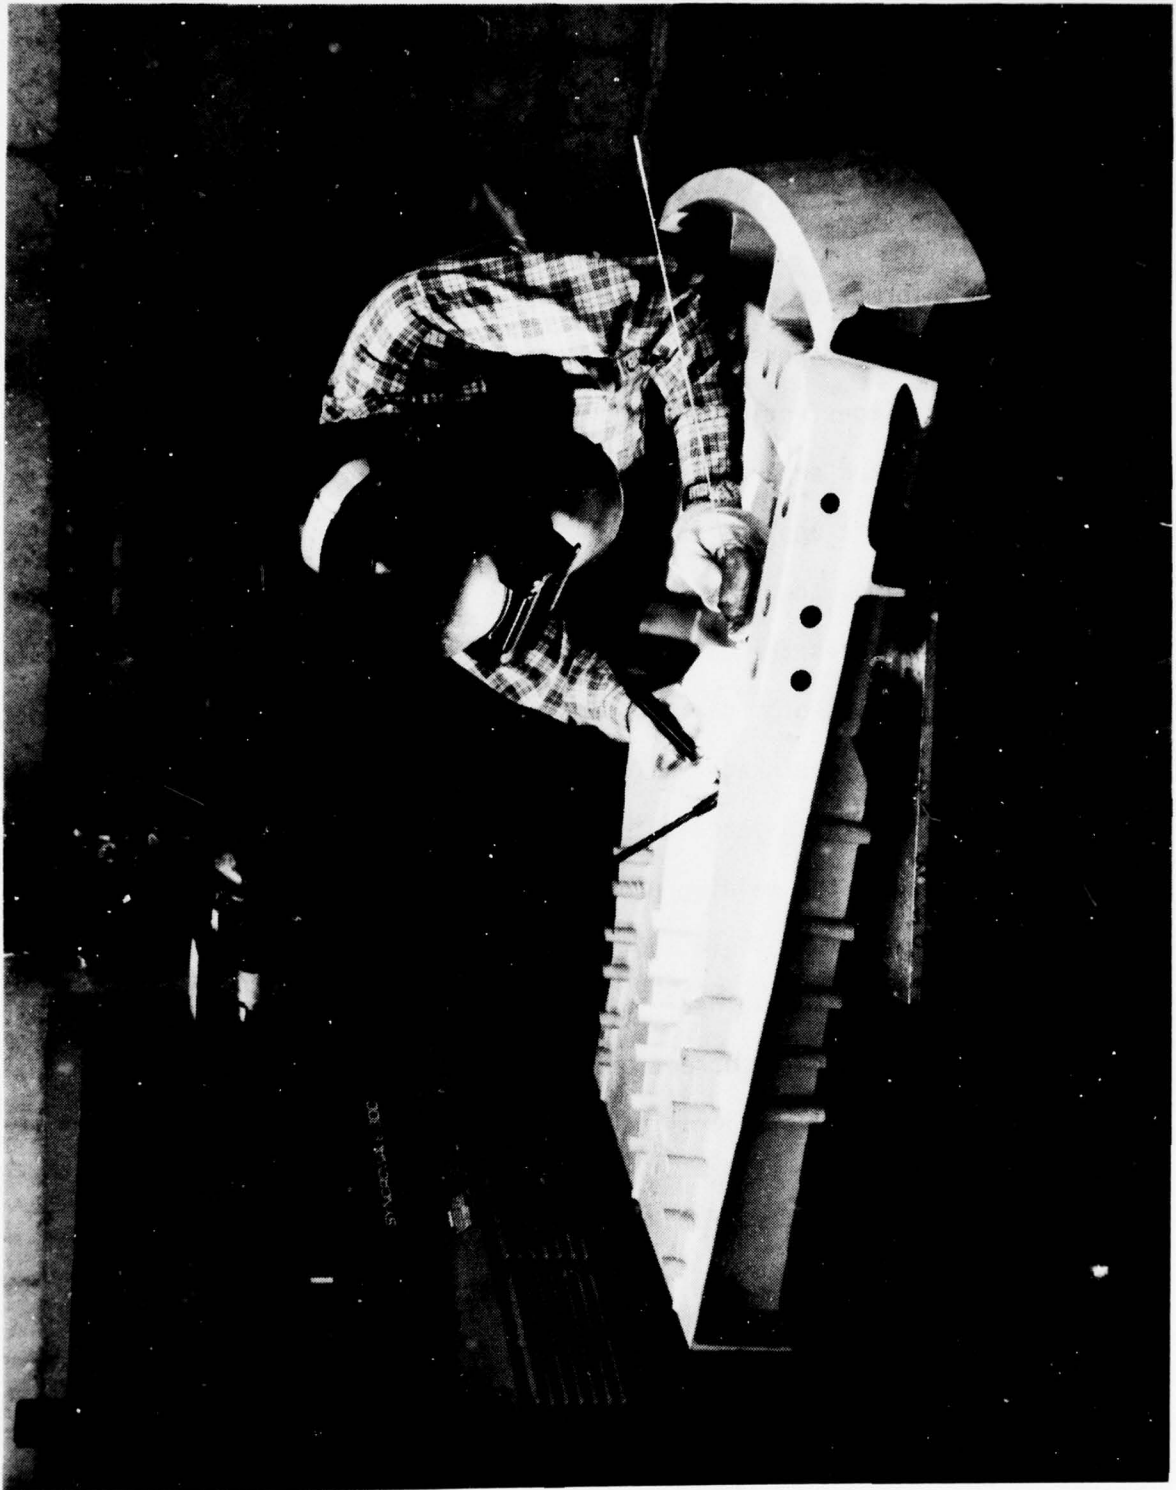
WELD CORRECTION OF CAST TEST PART
